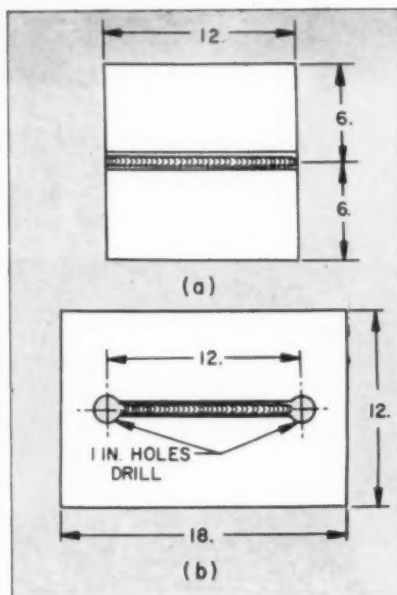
Unrestrained butt weld joint test specimen (a). Restrained specimen (b).
